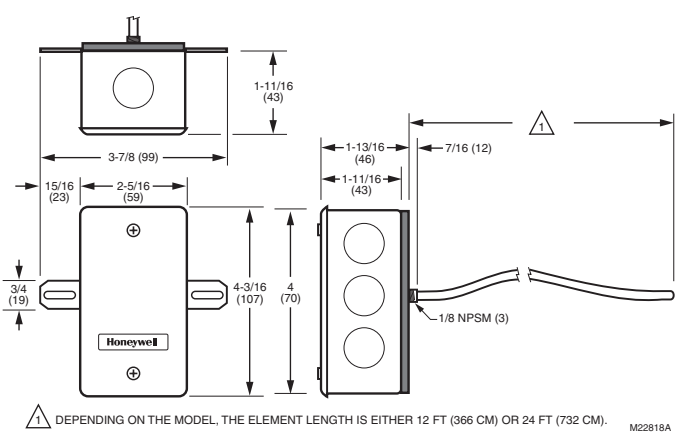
C7021R, C7023R, C7041R Dimensions in Inches (mm).
